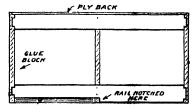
PLAN OF CUPBOARD. Showing front and back top rails.
